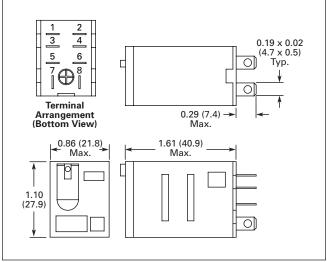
D7PF2 — Approximate Dimensions in Inches (mm)
